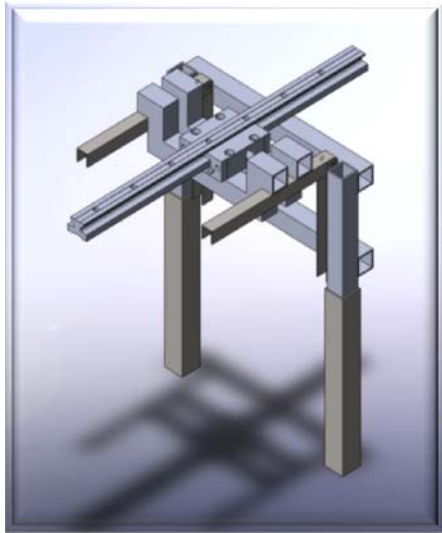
Redesign 2 - Ball Bearing Slide Mechanism
